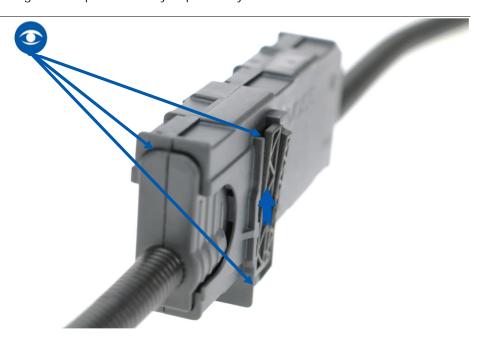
Incomplete assembly step of QC system 301 EFSP2 – side view
